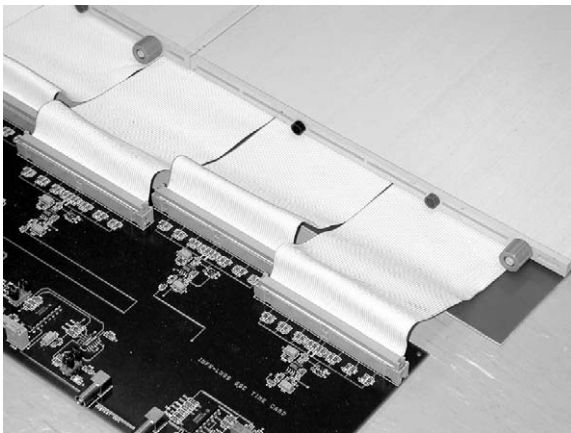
Magnification of the flat cable strip connected with the LNGS card by means of wiremount socket connectors.
